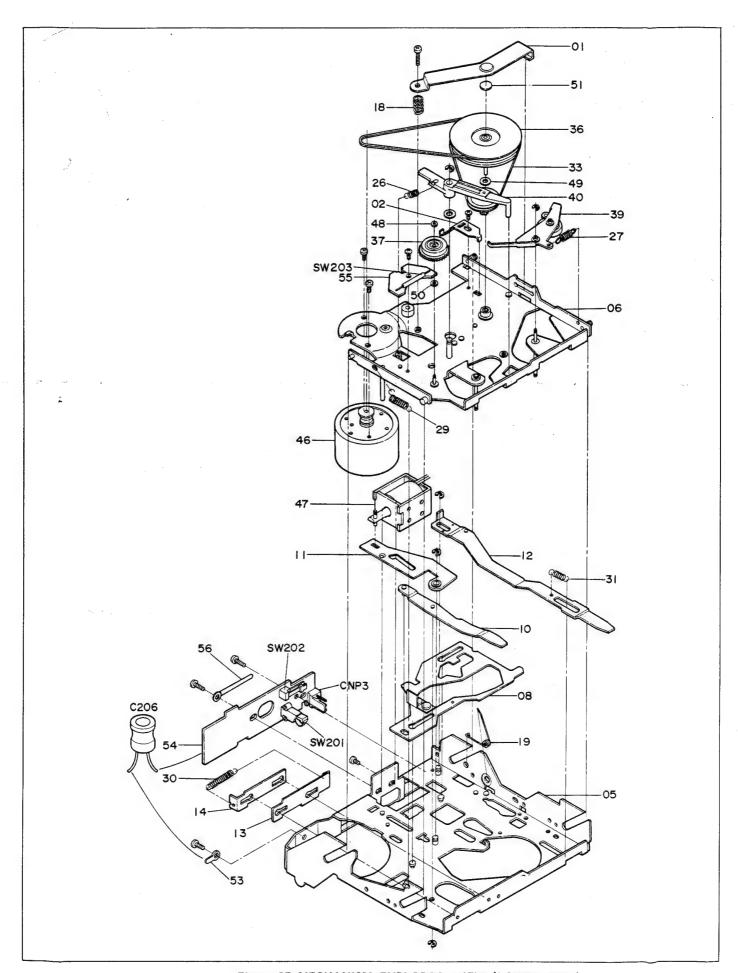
MECHANISM EXPLODED VIEW (LOWER SIDE)
